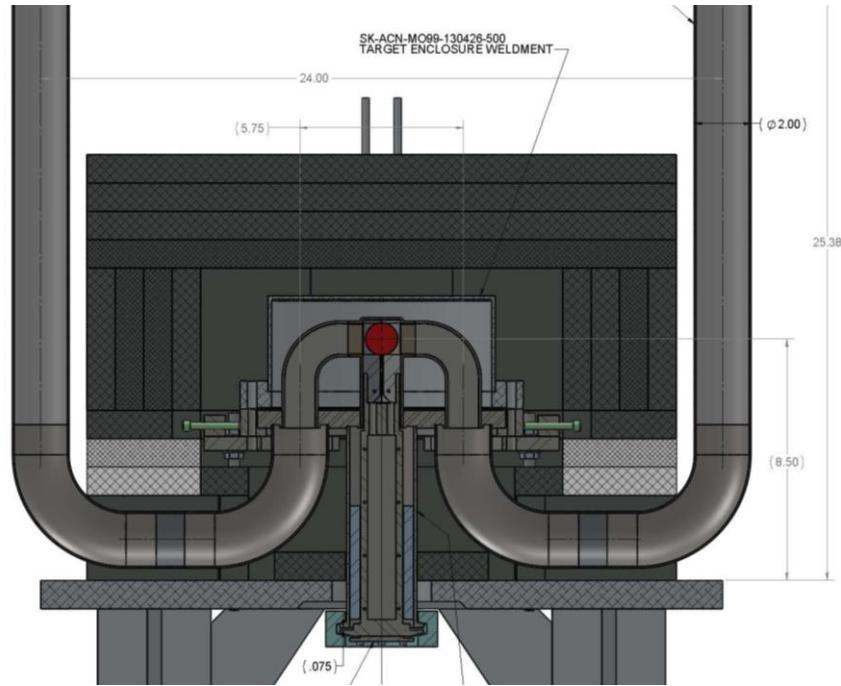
Cross-section view of the overall assembly. The top hat connects to the beam pipe vacuum. Target is illustrated in red. Pb shielding surrounds the top hat enclosure.
